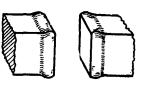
PLAIN BUTT JOINT (BEFORE FORGING)
